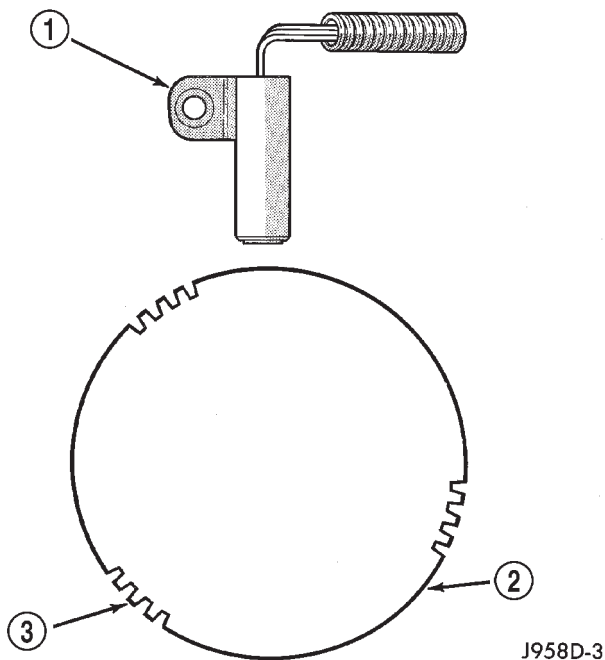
CKP Sensor Operation—4.0L 6-Cyl. Engine
